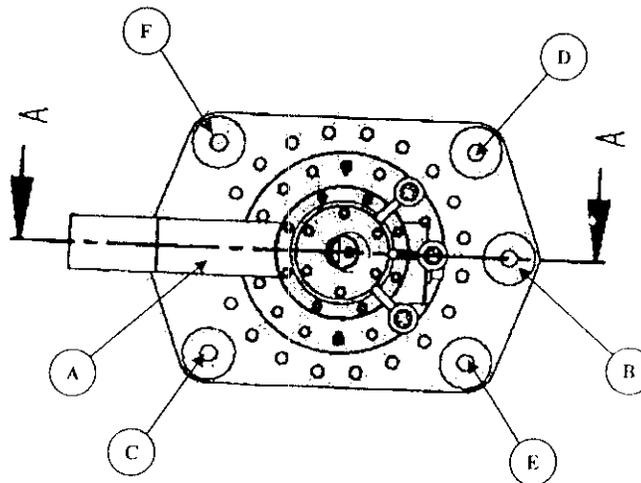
The specified sequence for tightening the Belleville washer assemblies.
